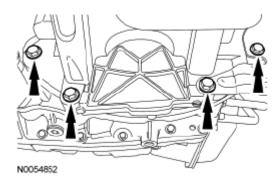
Locating Inspection Cover Fasteners Courtesy of FORD MOTOR CO.
